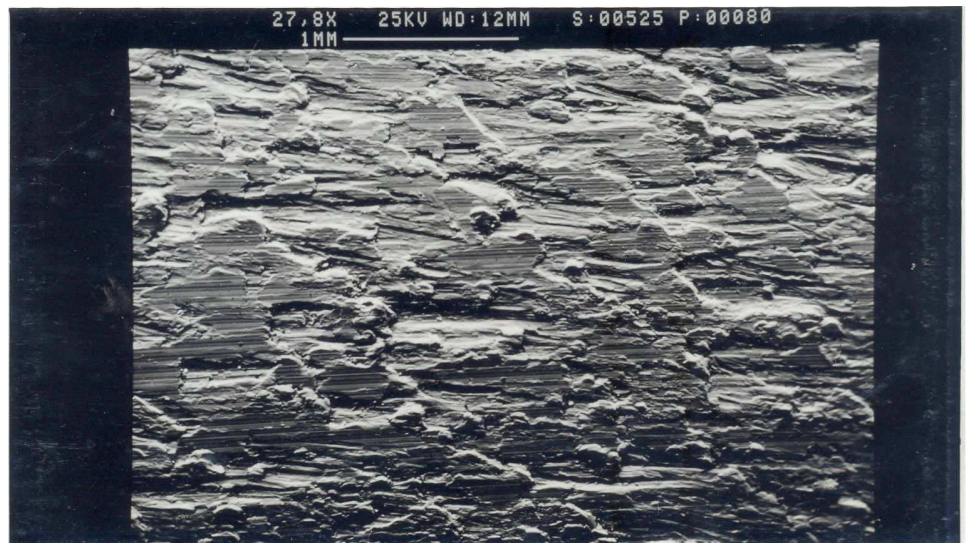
Surface finish of 247165 cold drawn at a speed of 150m/min.
